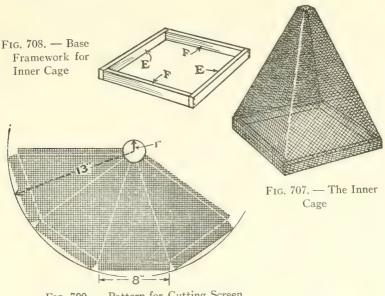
Pattern for Cutting Screen Wire for the Inner Cage
